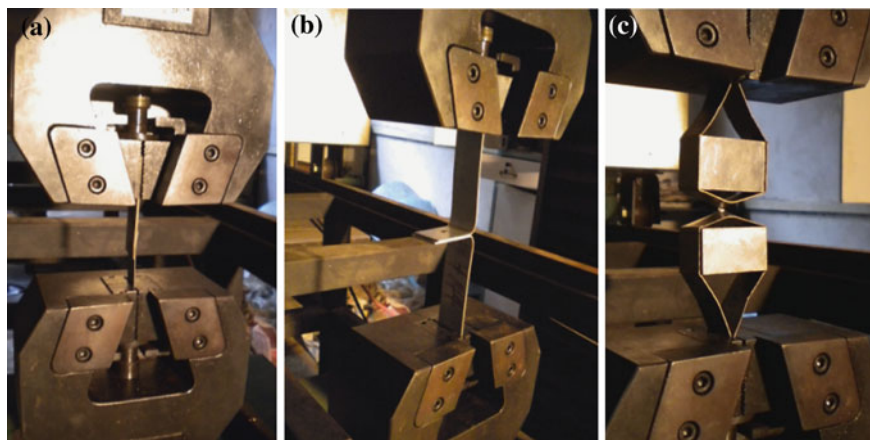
Spot weld tensile test under different loading cases. a II type, b L type, c O type
